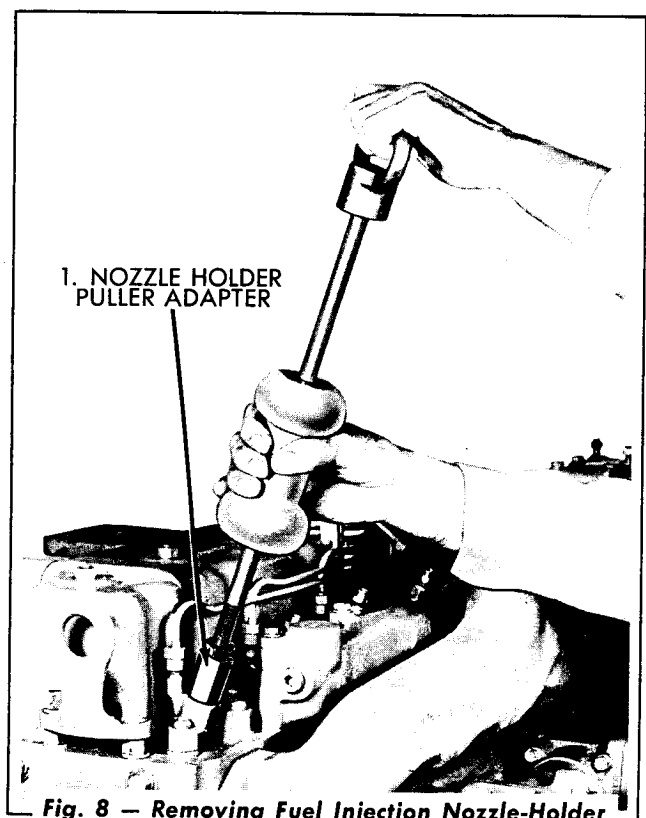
Removing Fuel Injection Nozzle-Holder
